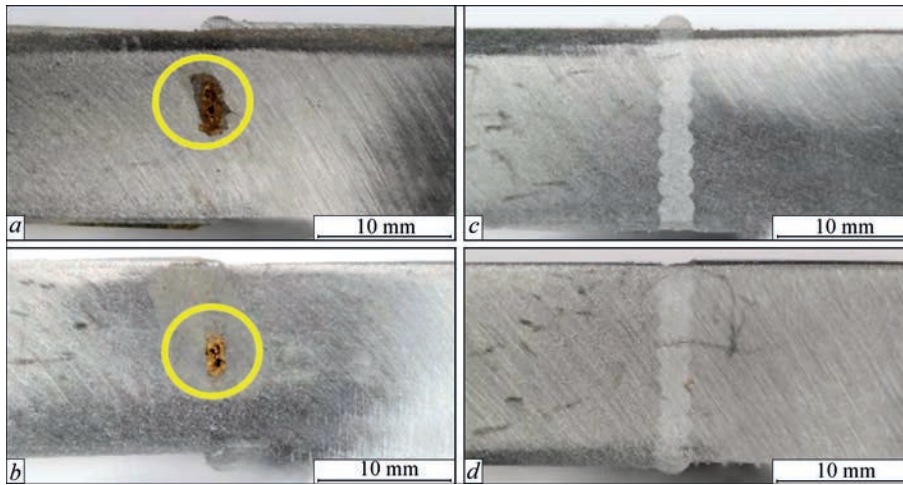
Corrosion specimens; without coated edges (a) and (b), with coating (c) and (d)
